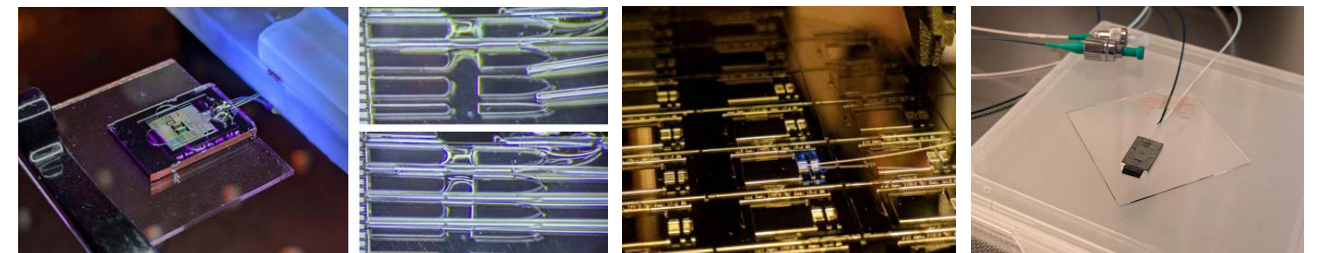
Fiber insertion and fixing process guided by the imprinted passive alignment structures. A wafer-scale imprint and assembly can be implemented to reduce the assembly costs. A fully-assembled PIC device ready for optical testing.
